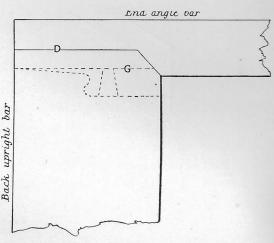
Full-size End Elevation of Joint at B (fig. 988)
